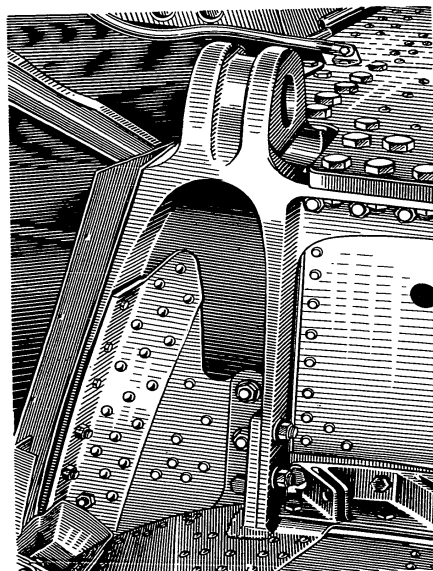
GEAR BOX MOUNT ATTACHMENT UNIT ON FRAME NO.14.
